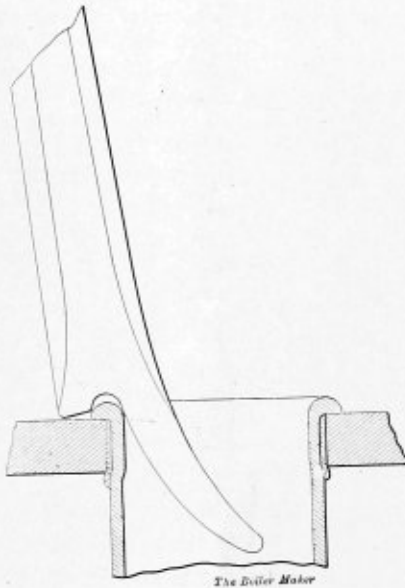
BEADING TOOL WITH BLUNT HEEL.
